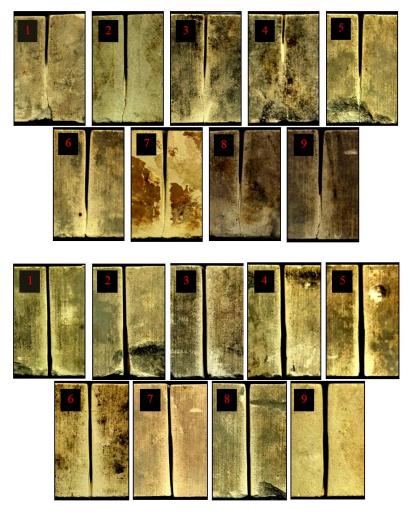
(up) Cutting surfaces of the workpieces subjected to one-pass cutting for each test. (down) Cutting surfaces of the workpieces subjected to two-pass cutting for each test.
